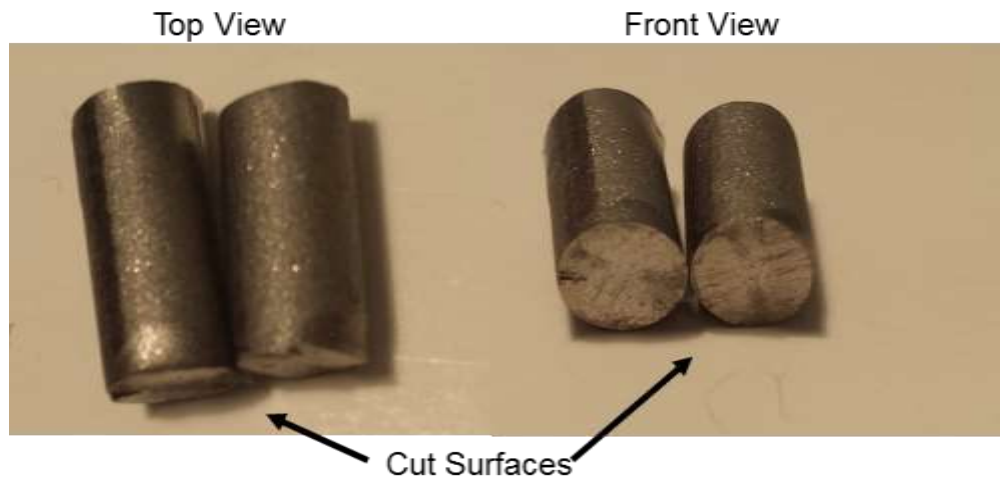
Typical cut surfaces of CoCr rods, using the shear cutters
